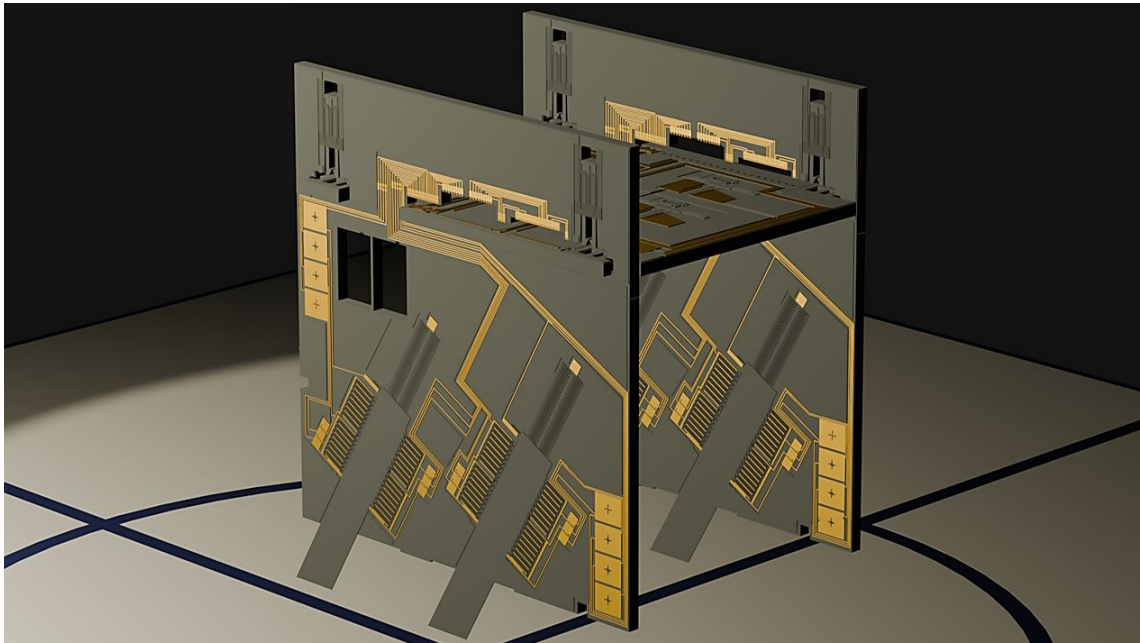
Depiction of the 3D CAD assembly of the rectangular device-layer legged walker with hat chip. The circle on the walking surface has radius 2.5 *cm*.
